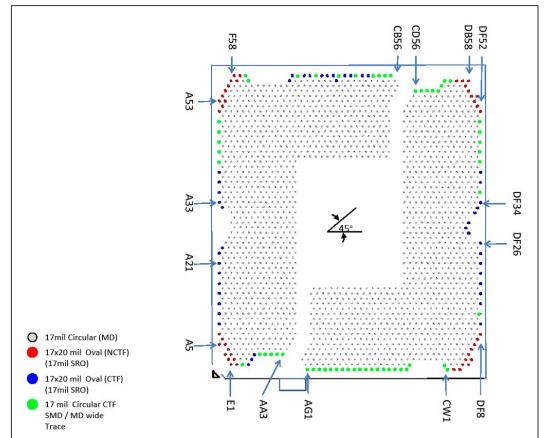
LGA2011-0 Socket Land Pattern (Top View of Board)
